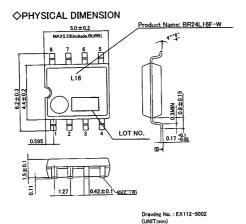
(a) PHYSICAL DIMENSION SOP8 (BR24L16F-W)
